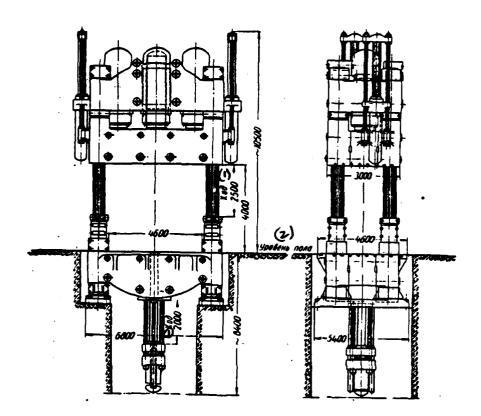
Corner post-type press with a press of 4500 t for the hot die forging of thick sheets.
